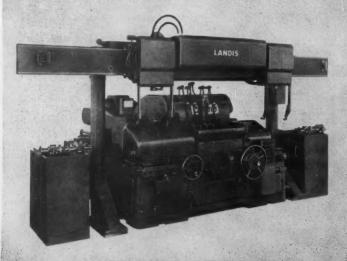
Automatic 16- by 40-inch multiple-wheel grinding machine to be displayed by Landis Tool Co.
